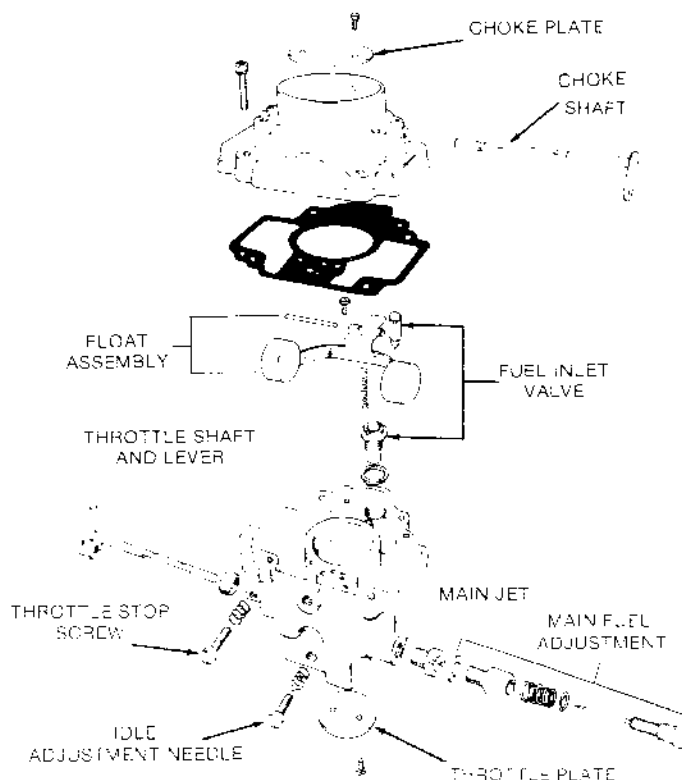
DOWNDRAFT LVA CARBURETOR ASSEMBLY
